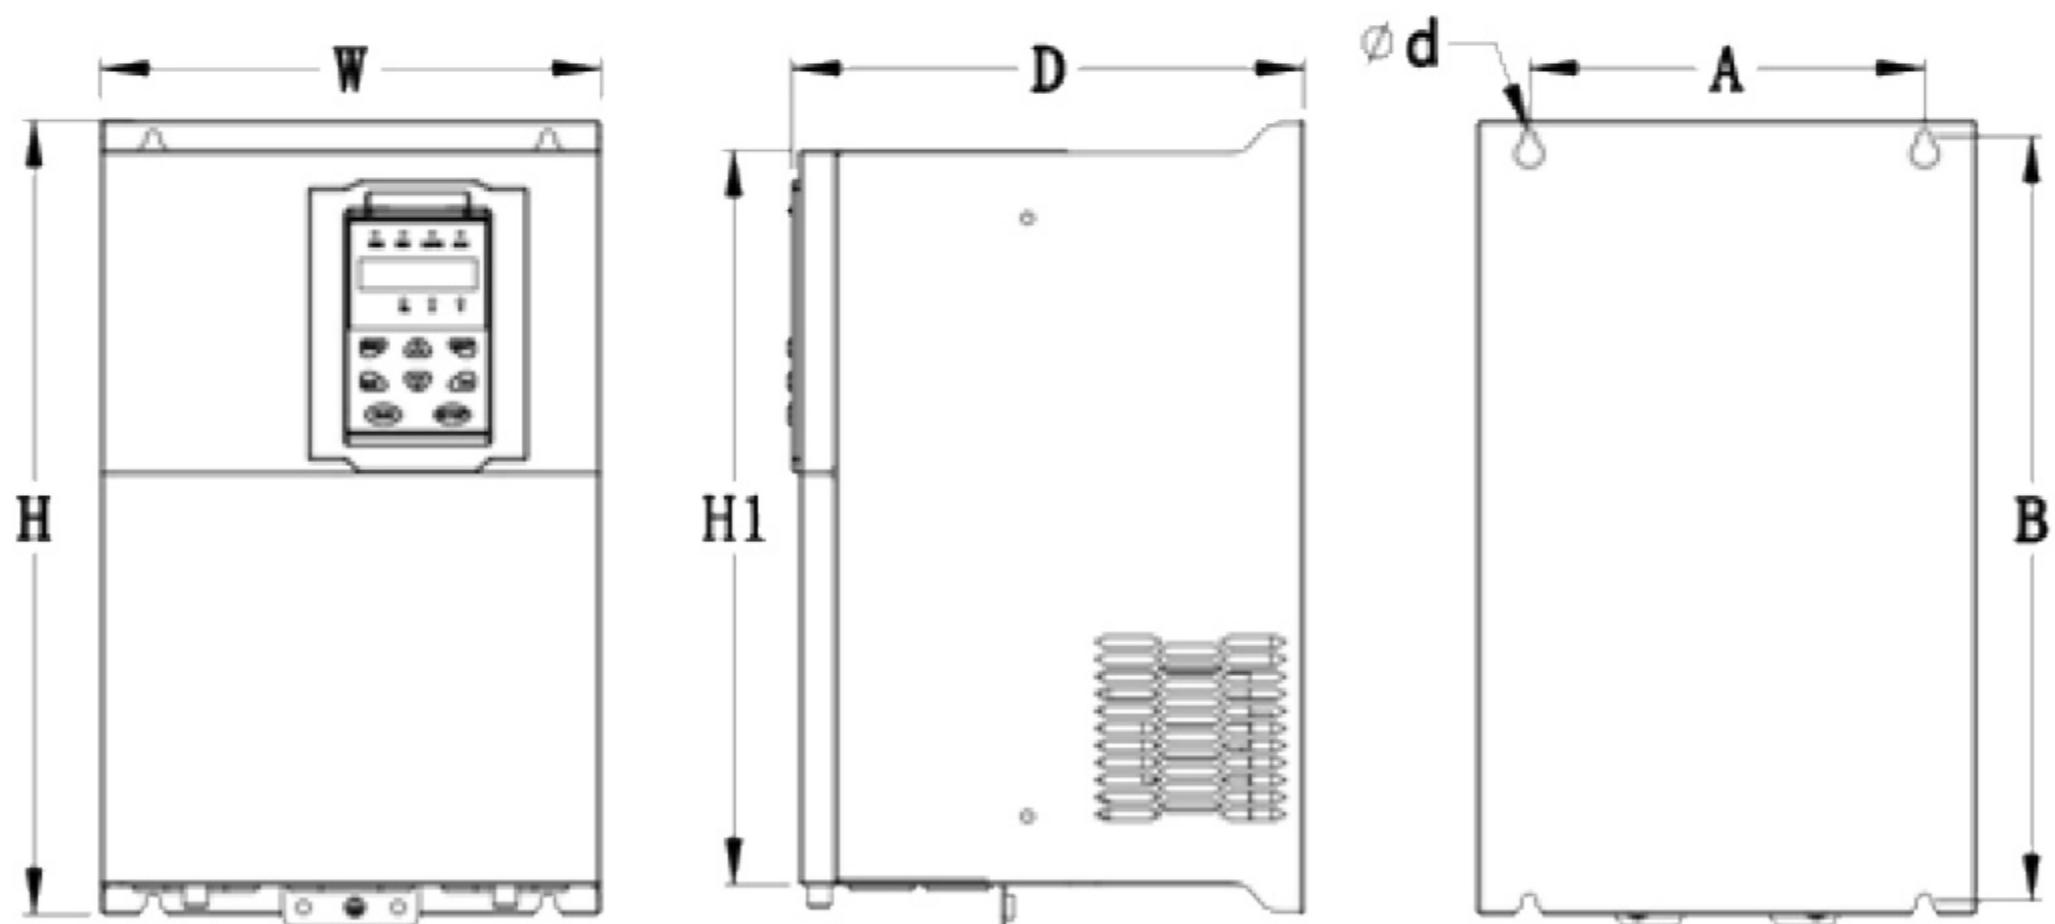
SIZE D~G(18.5KW-90KW) Dimension
